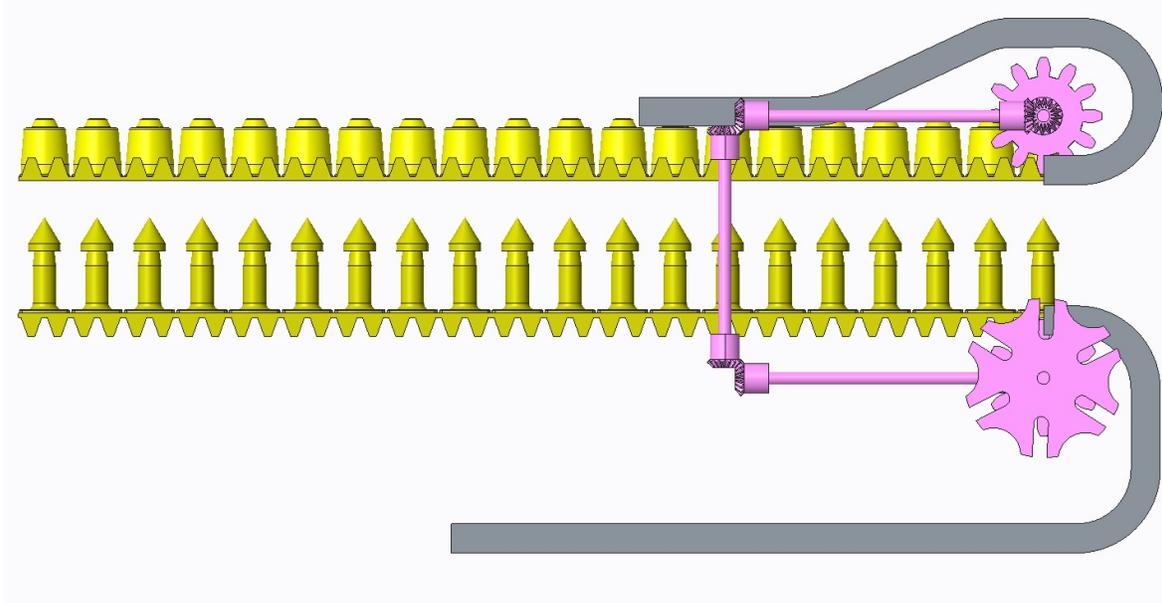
Feeding mechanism. The grey parts are the chutes through which the expended rack is fed. The male feed pinion is covered by the driven wheel of the Geneva mechanism.
